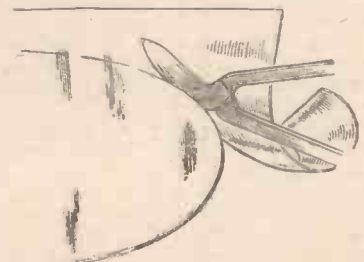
When using curved shears the blade tips should point away from the cutting line.
